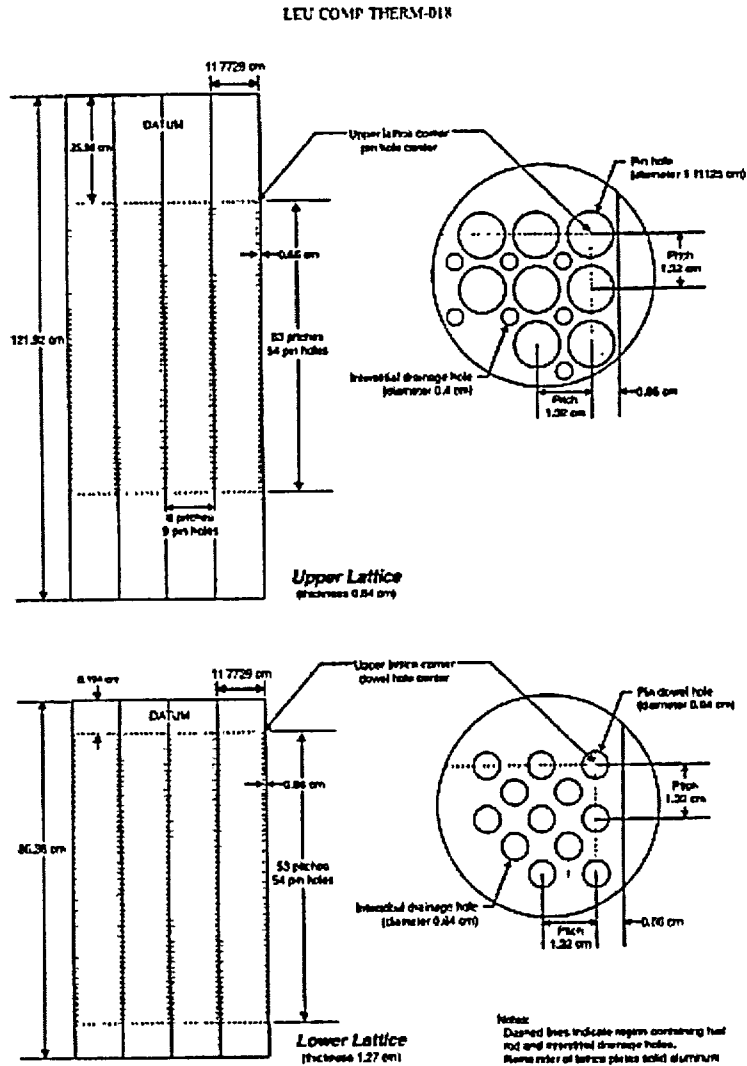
Simplified Plan Views of Upper and Lower Lattice Plates.
